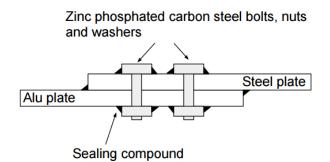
Bolt assembly with CP between aluminium and steel with zinc phosphated carbon steel bolts and sealing compound.
